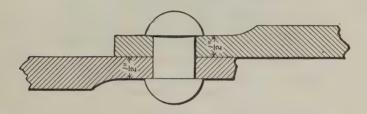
Circumferential Joint for Thick Plates of Horizontal Return Tubular Boilers
